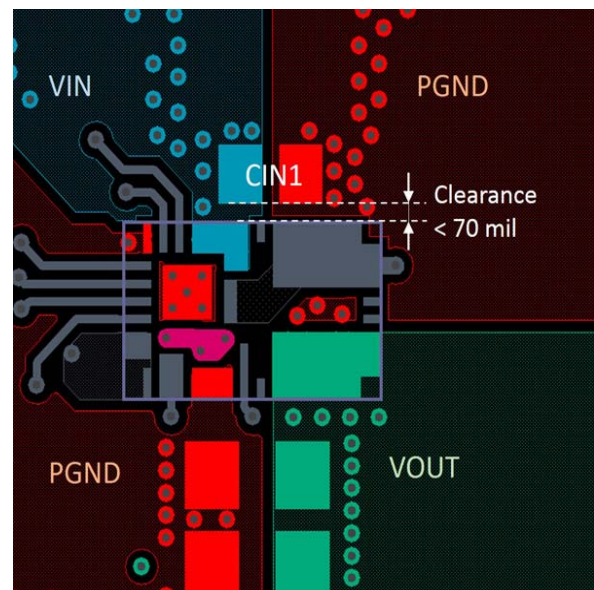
LAYOUT EXAMPLE - TOP LAYER
